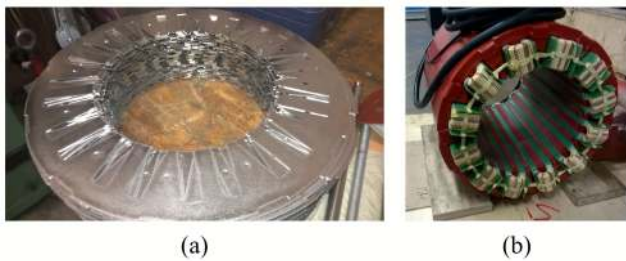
(a) Stator core sheets and (b) assembled stator.
